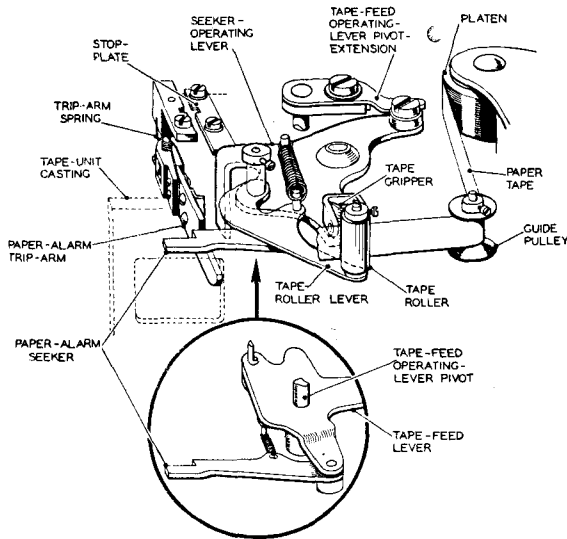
PAPER-FAILURE ALARM MECHANISM.
